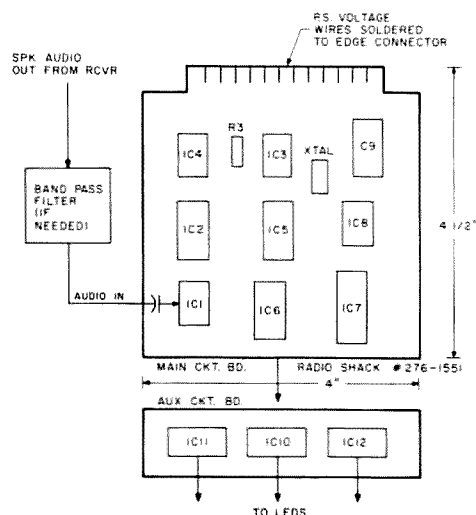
Main and auxiliary circuit boards showing IC arrangement.
